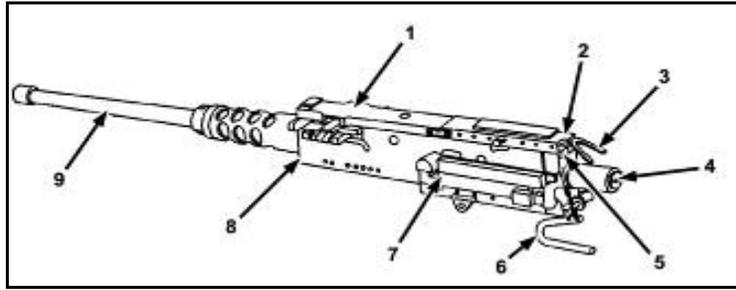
Caliber .50 machine gun, M2, heavy barrel, M48 turret type
